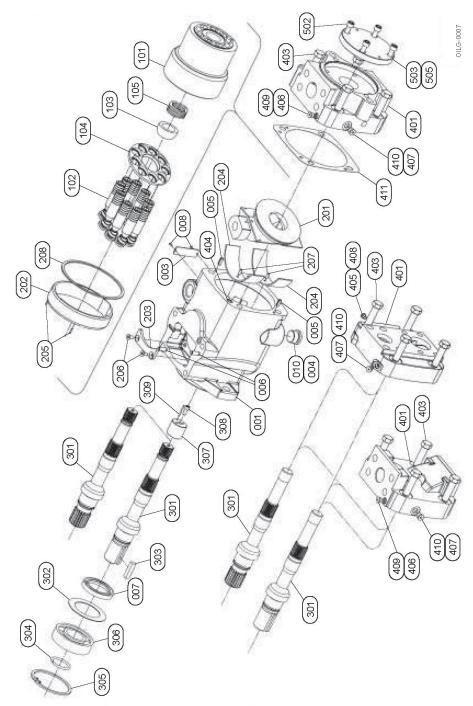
Exploded parts drawing, PVG 100/130 (516246 sheet 2 of 3).
